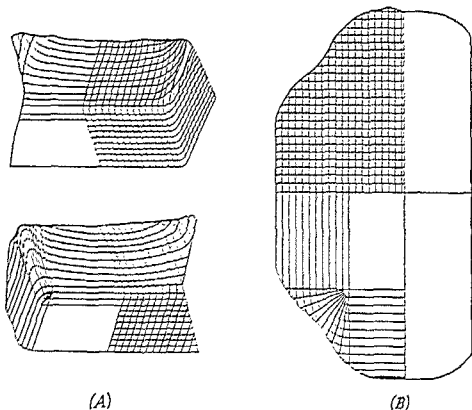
Metal flow in rectangular draws: (A) blank marked before drawing; (B) corner areas after drawing.¹
